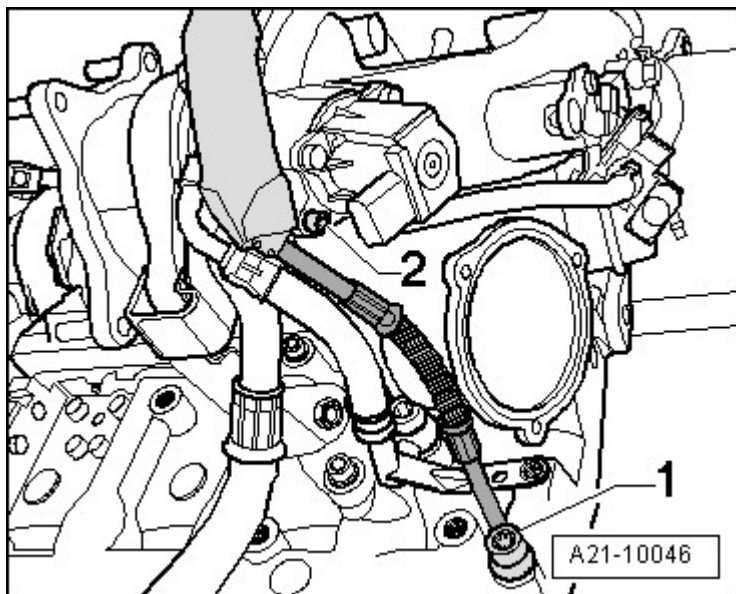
Cylinder Block And Turbocharger Oil Supply Line
